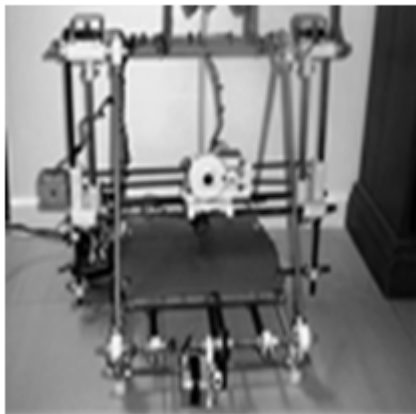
The Basic System - type printer – in this arrangement, the movable table moves in the Y horizontal plane, whereas the X-axis suspended on two stepper motors, moves horizontally <sup>(3)</sup>
